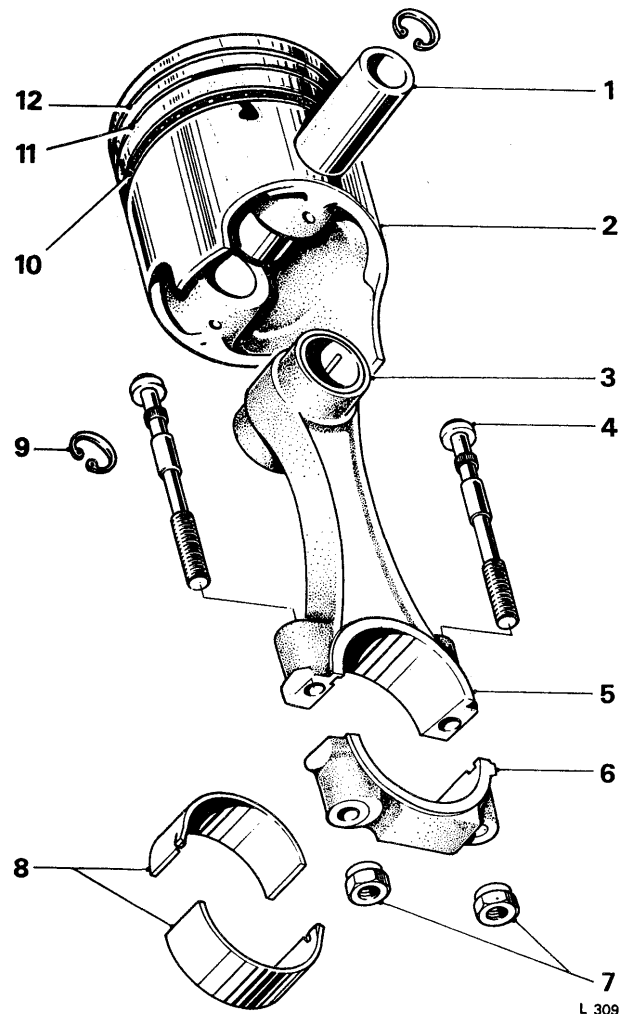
EXPLODED VIEW OF PISTON AND CONNECTING ROD ASSEMBLY
